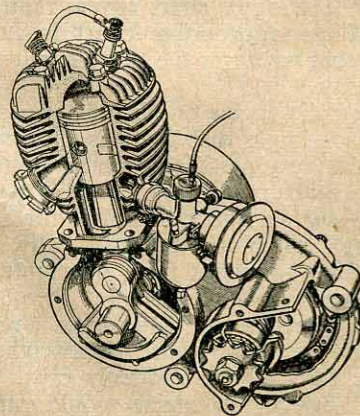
A cut-away drawing revealing the detail construction of the 98 c.c. Mark 2F Villiers autocycle unit. The near-side crankcase half has been removed for clarity
